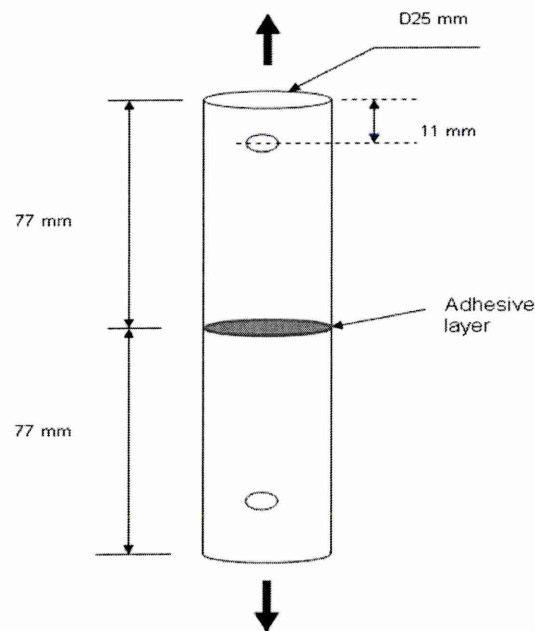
Geometry and dimensions of tensile test specimen (Butt joint)
